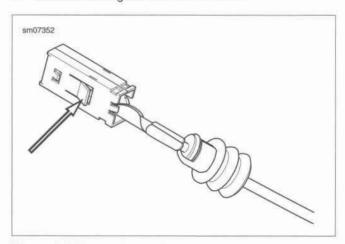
Tangs: Bosch Compact 1.1M Socket Terminal
